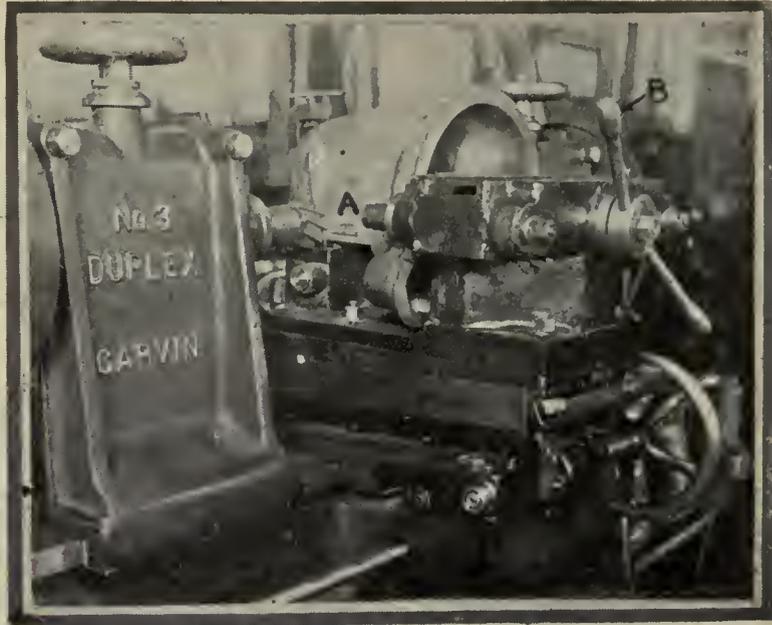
AN EFFICIENT DUPLEX MILLING FIXTURE.
